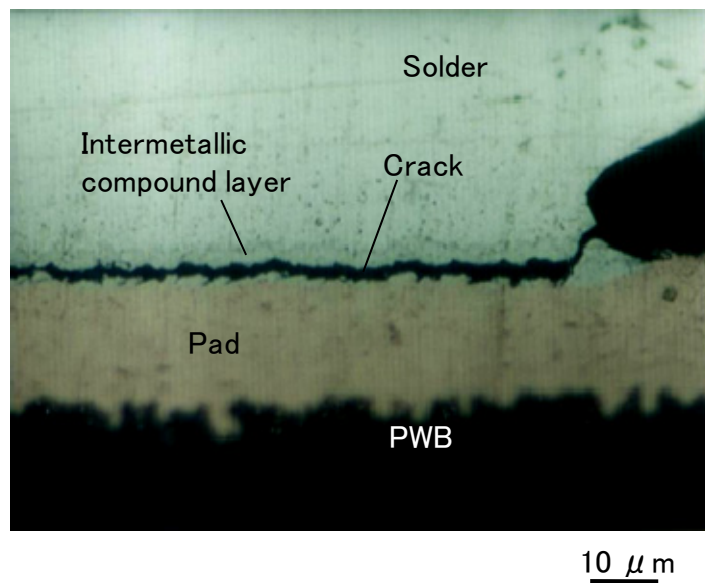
20 Cross section of failure in a solder joint.
